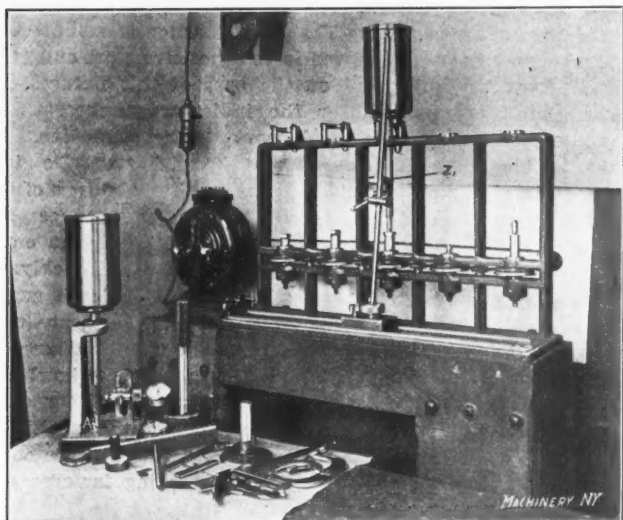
Testing Outfit for Inspecting the Bowls and Spindles
